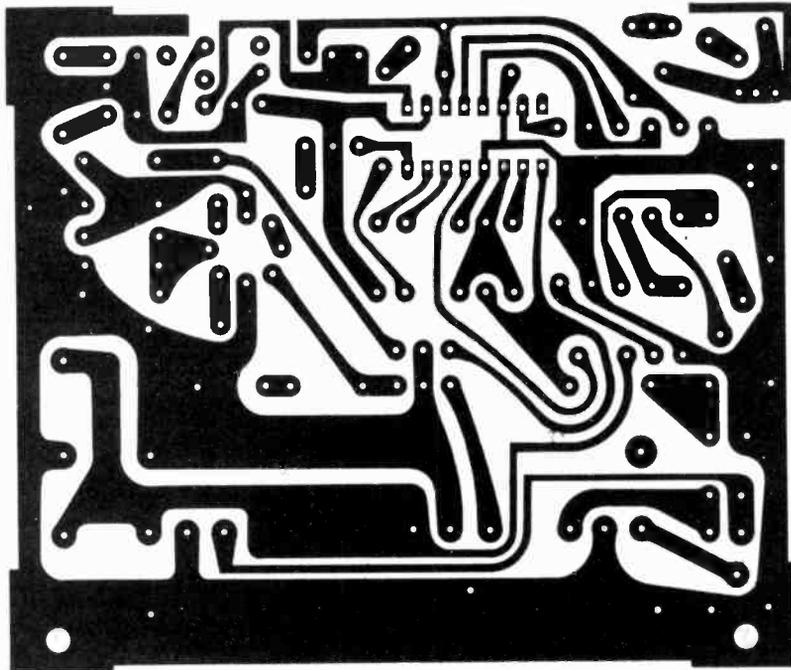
Printed circuit master for the f.m. tuner using the Larsholt head
